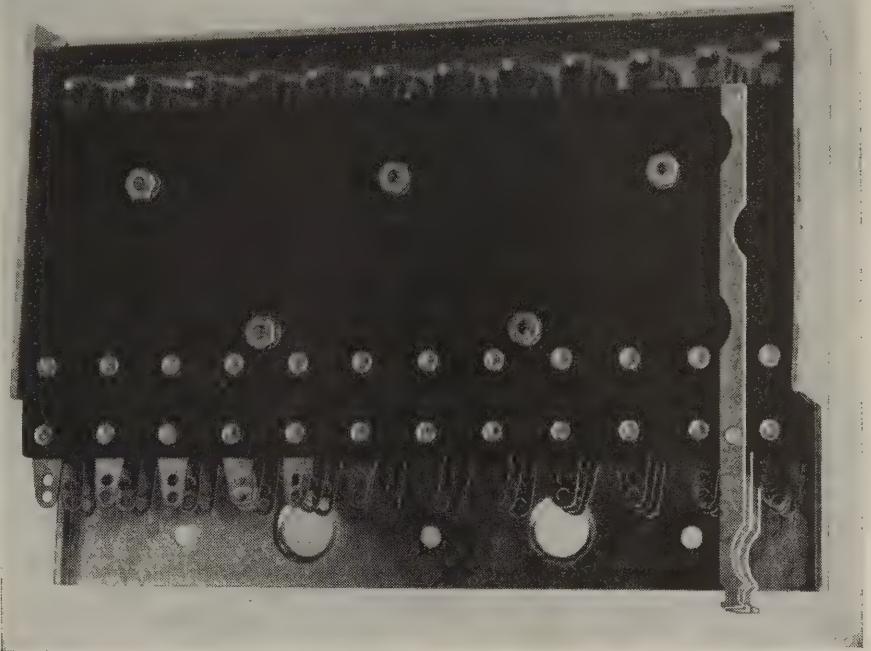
Upper side of switch assembly reveals input and output solder lugs.
